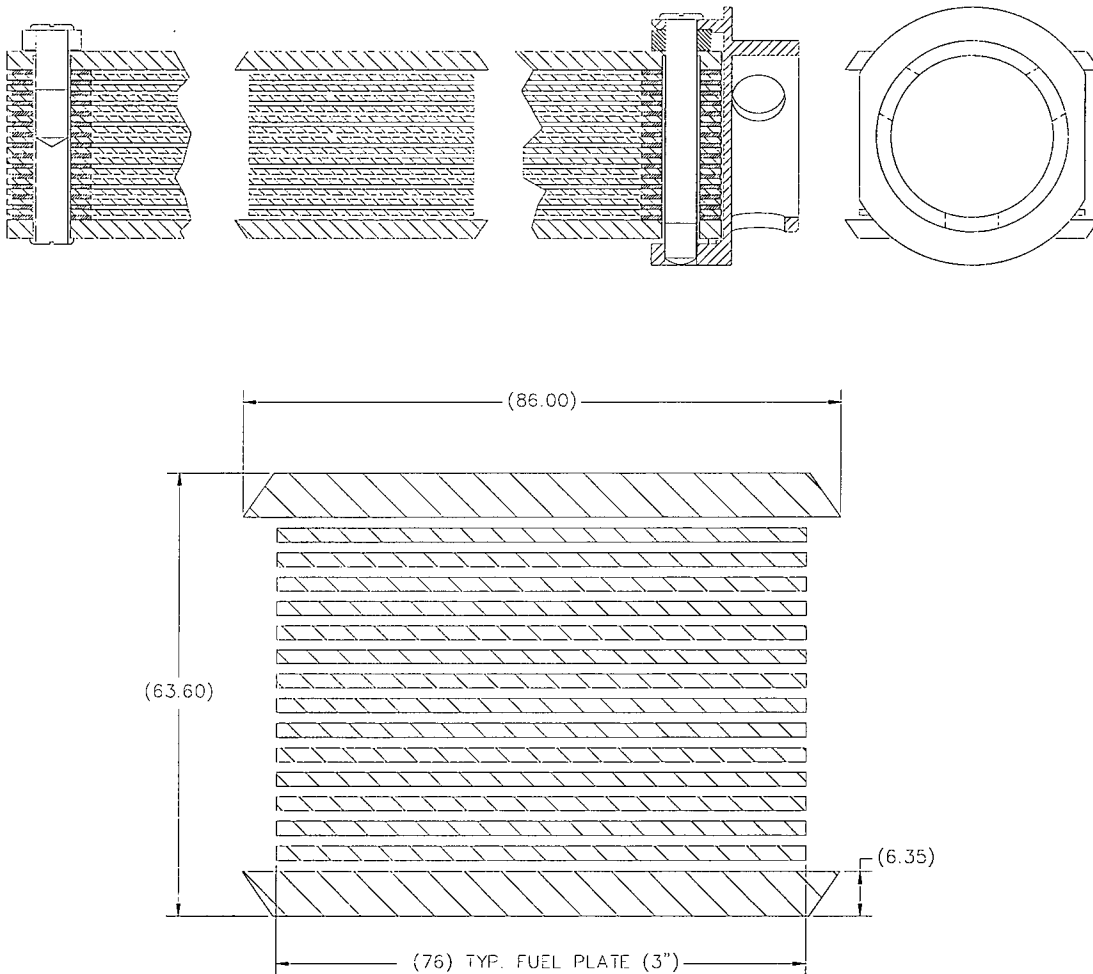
Spiral Fuel Assembly Cross-Section Sketch
